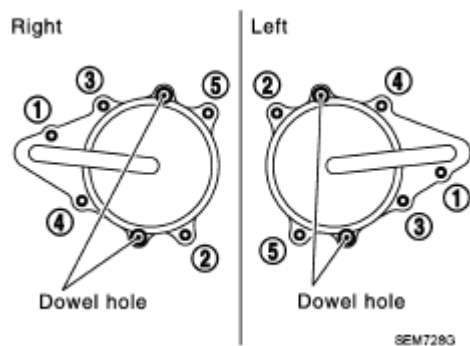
Identifying Intake Valve Timing Control Covers Bolts Loosening Sequence
